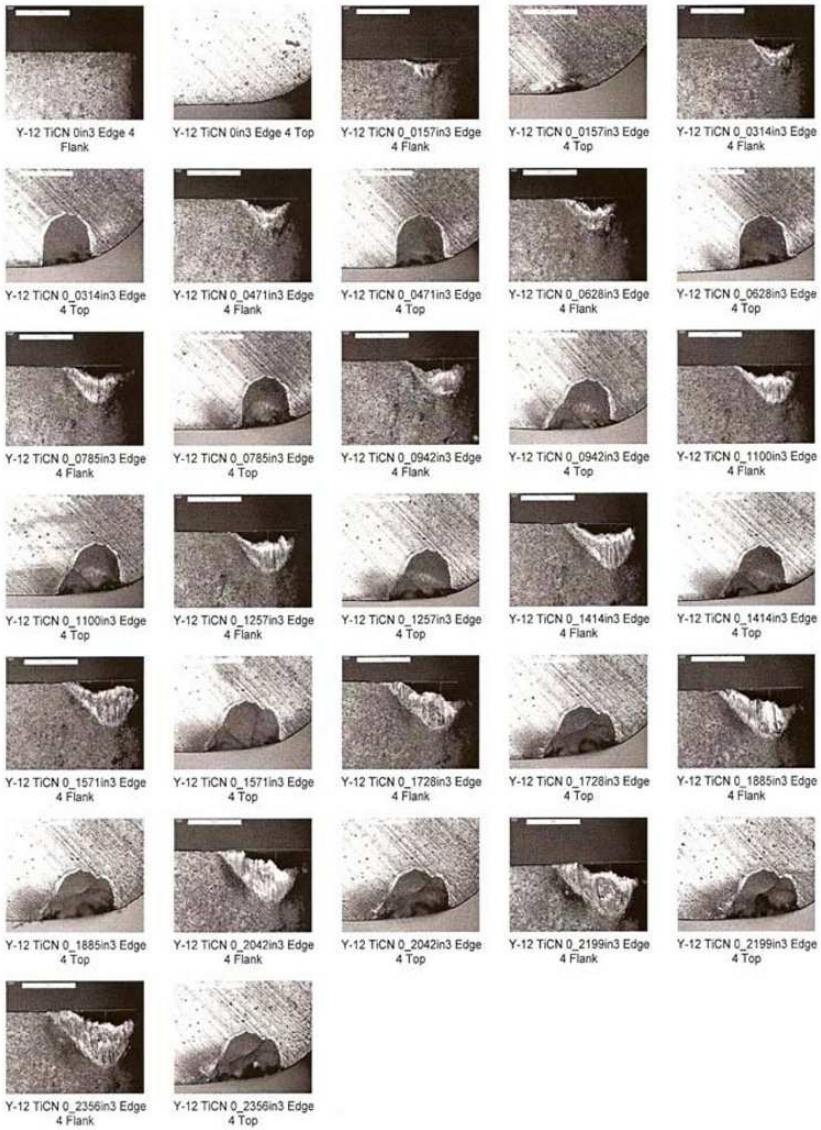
TiCN Tool Cutting Edge 4 machined at 200 RPM. 0 – 0.2356 in³ workpiece removed
